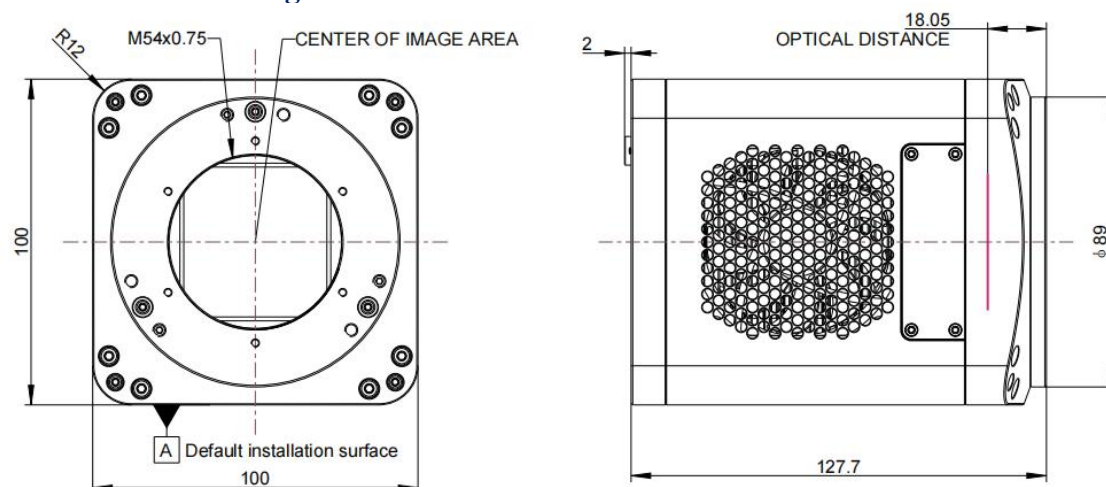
5 sMAX16AM & sMAX16BM dimensions (mm)
